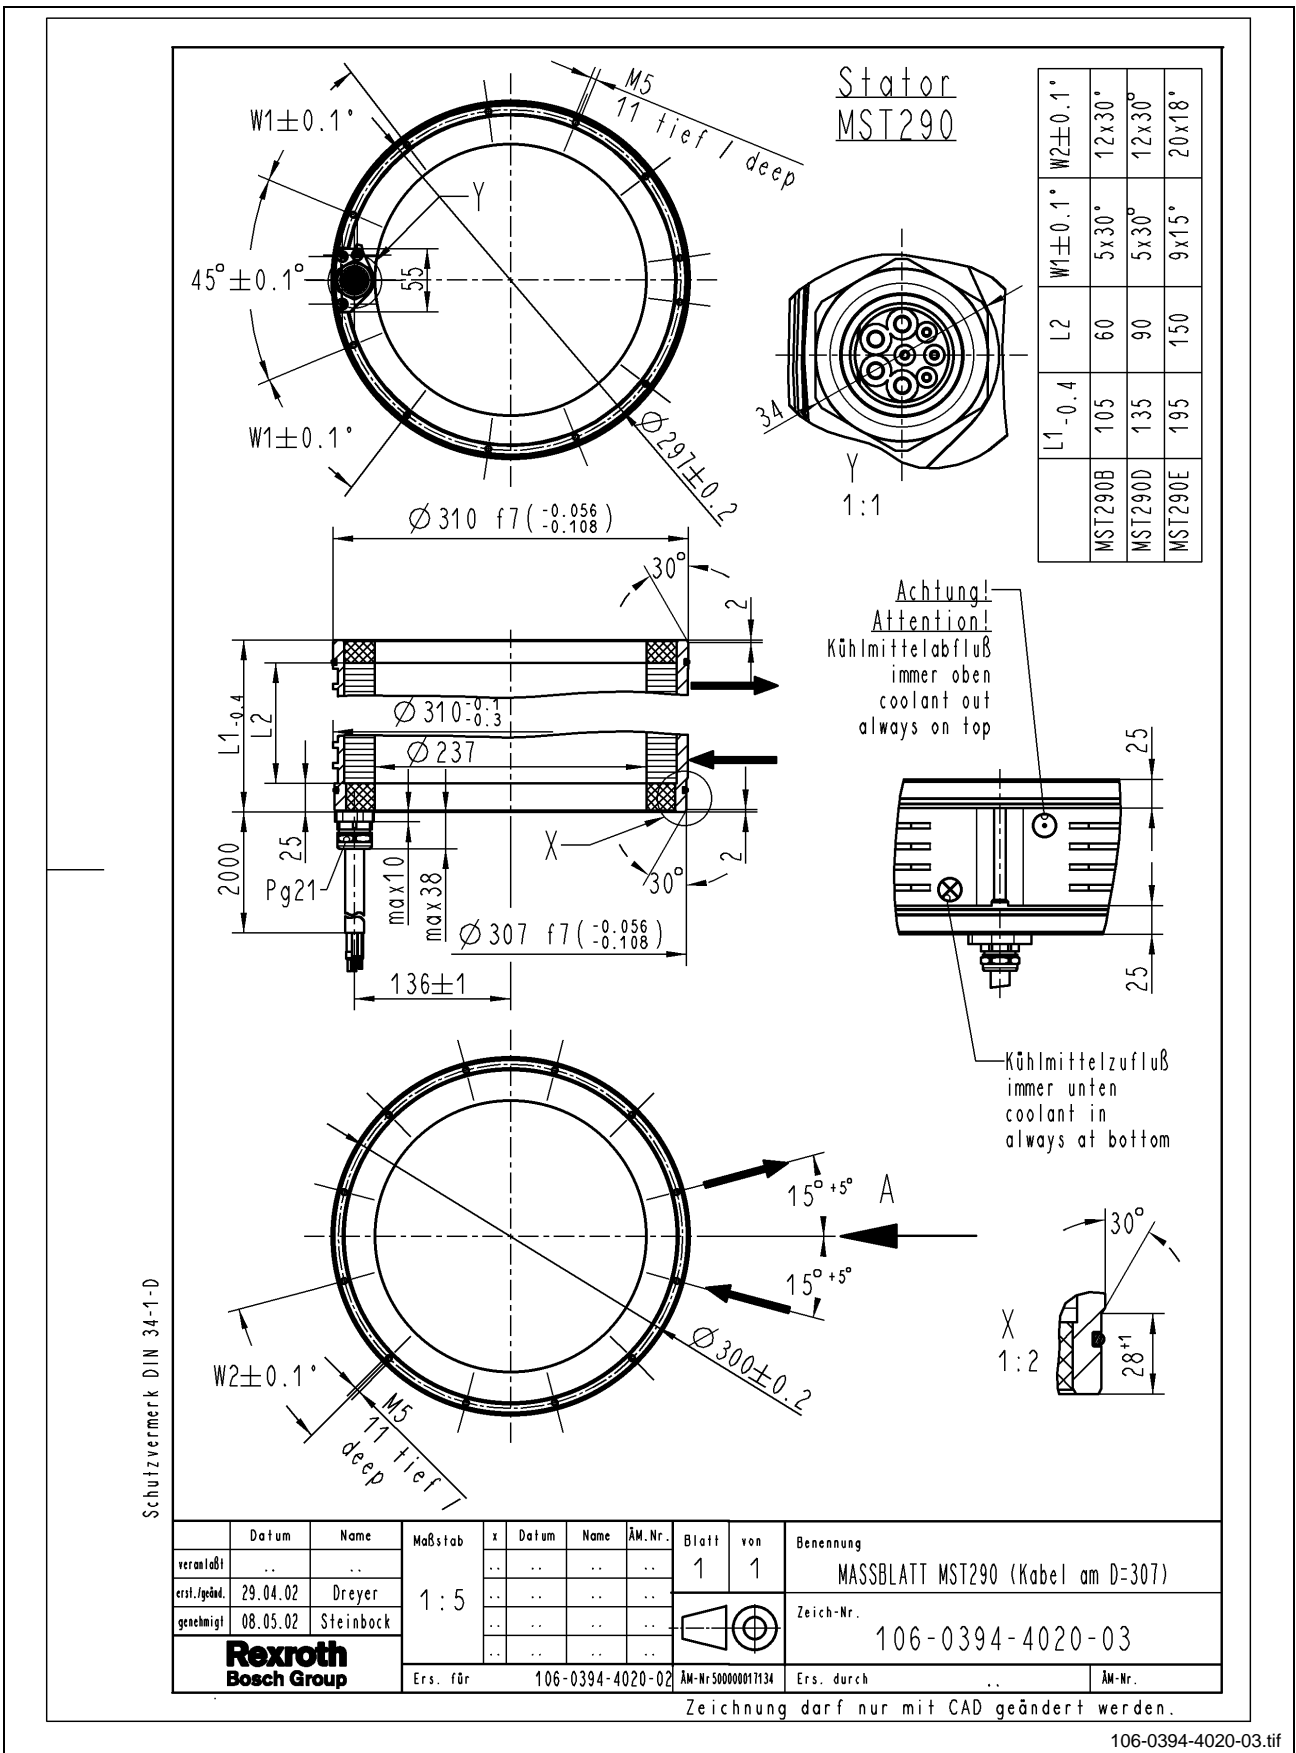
Dimension sheet MST290, electrical connection "SN"
